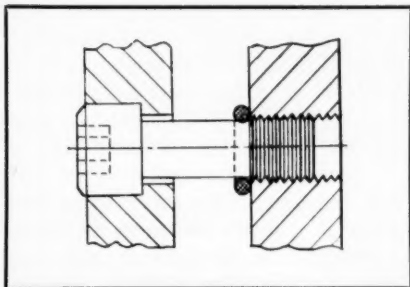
A commercial socket head cap screw is used in this design of cover latch.
